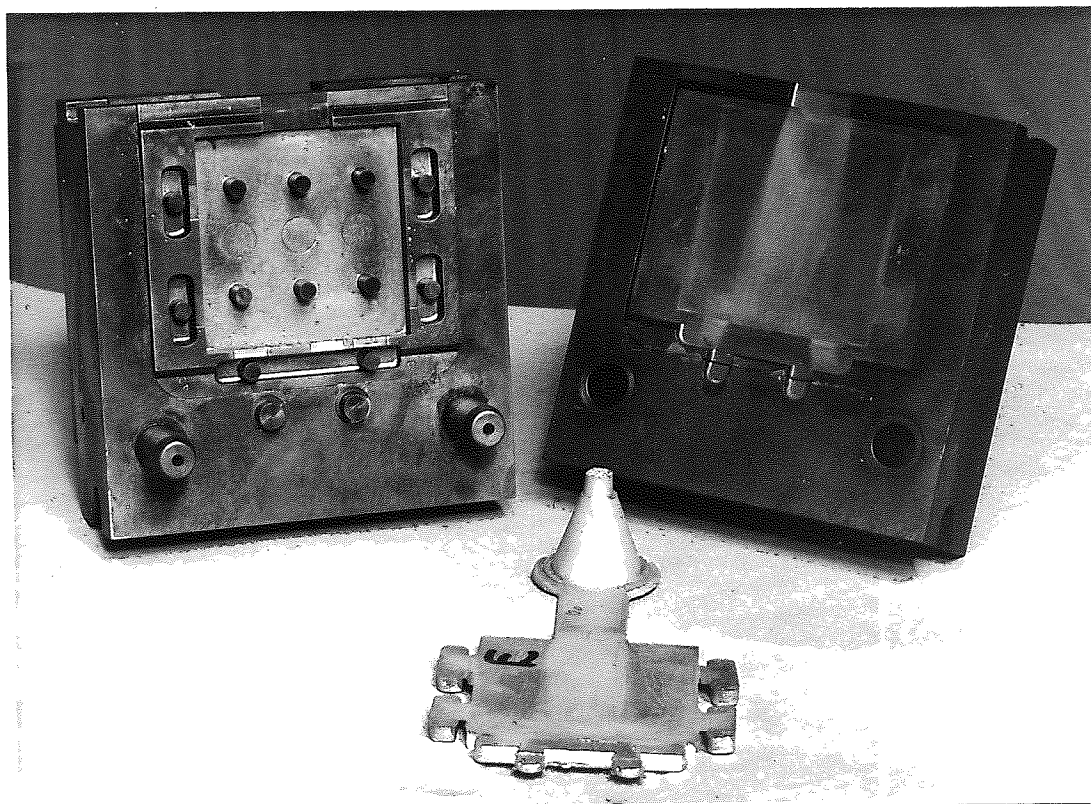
EXPERIMENTAL TOOLING FOR DIECASTING MACHINE
